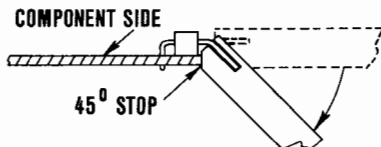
A SPECIAL BENDING TOOL—supplied in the complete kit—is recommended for forming the header strip lugs.
